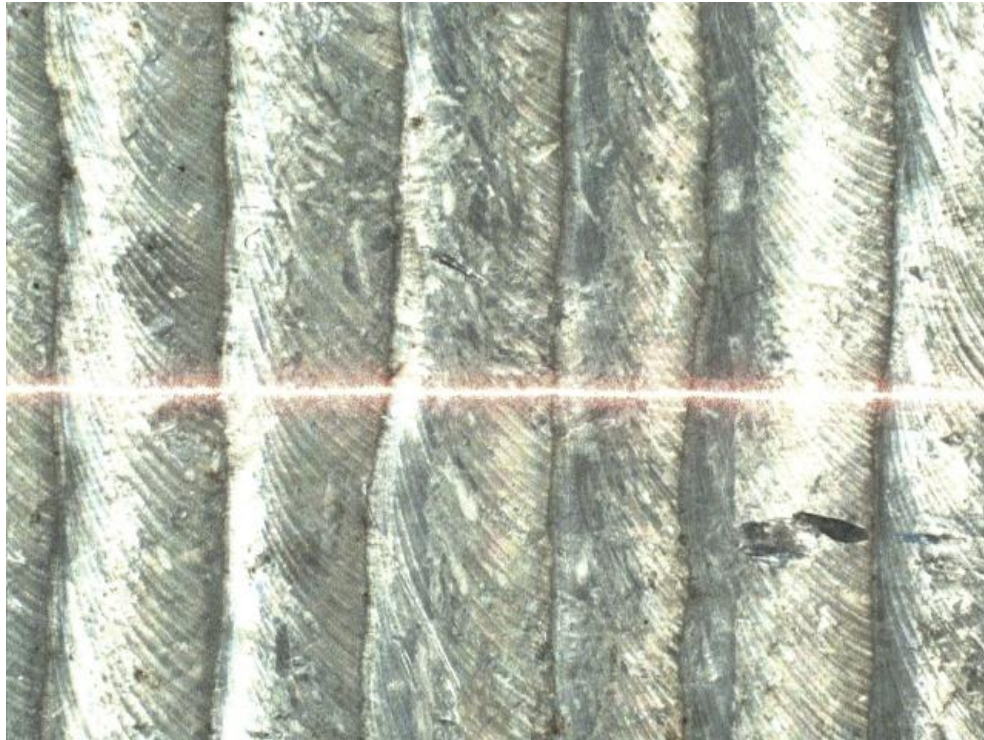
(a) Spirally welded pipe image with Laser Stripe overlay
